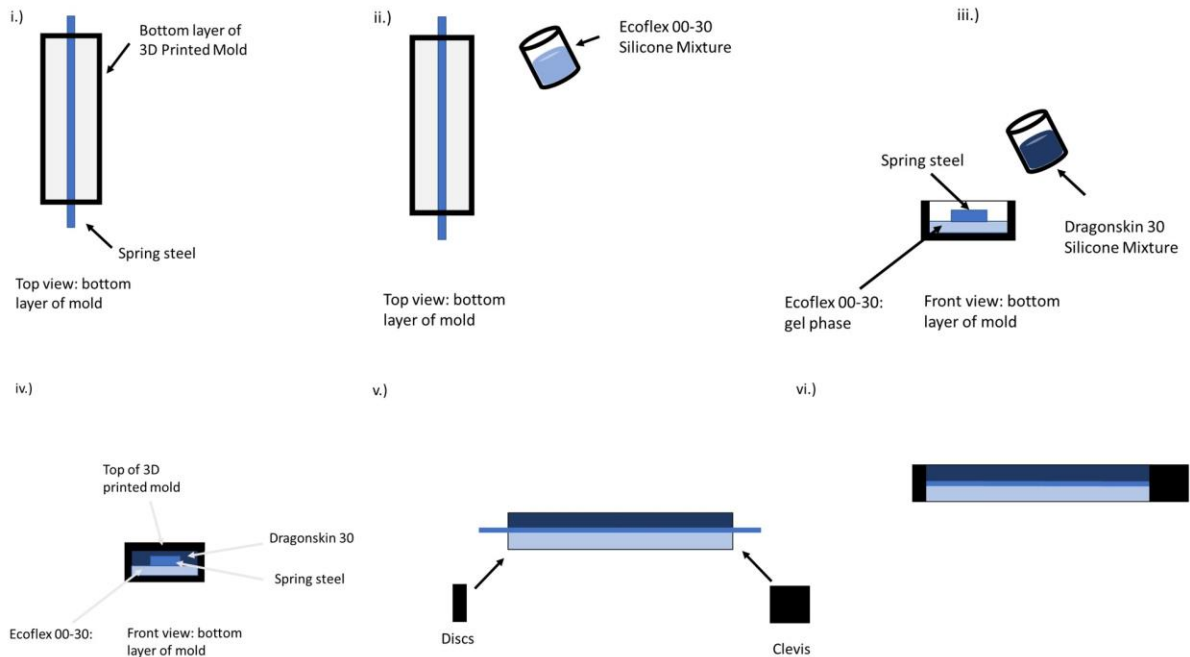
Fabrication process for compliant mechanism. The process can be summarized in 6 steps. i.) The 3d printed model has an inlet that allows the spring steel to slide completely through it. The spring steel is placed in this inlet prior fabricating the soft silicone body ii.) The silicone mixture for the Ecoflex 00-30 was formed. This forms the bottom layer of the mechanism and is poured into the mold. This layer of silicone is allowed to cure until it reaches gel phase which occurs at approximately 45 minutes. iii.) After the silicone is allowed to reach gel time the mixture for the Dragonskin 30 is created. This silicone mixture is then poured on top of the Ecoflex 00-30. iv.) Pouring the liquid Dragonskin 30 on the Ecoflex 00-30 mixture before it has fully cured will cause the two mixtures to bond together. The top of the 3d printed mold is then placed onto the bottom of the 3d printed mold to fully encapsulate the combined silicone mixture. This mixture is then given 14 hrs. to fully cure. v.) After the mixture has fully cured it is removed from the 3d printed mold. A 3d printed rectangular disc is attached to one end of the spring steel while a 3d printed regular plate is attached to silicone body at the opposing end. There is also a channel in this rectangular plate that allows the steel to slide through the plate vi.) Completed compliant mechanism.
